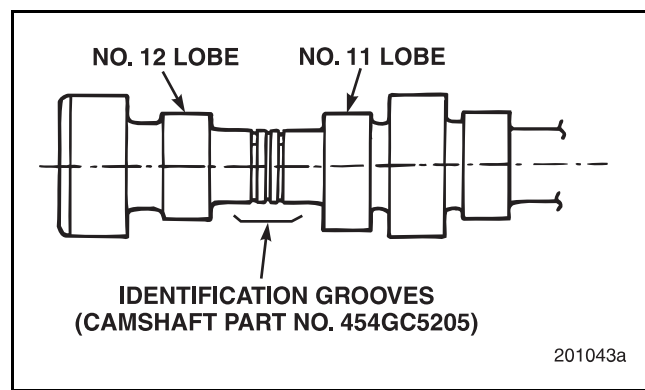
Camshaft Identification, Part No. 454GC5205
